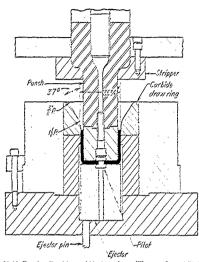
Method of attaching carbide wear rings to large punches.
